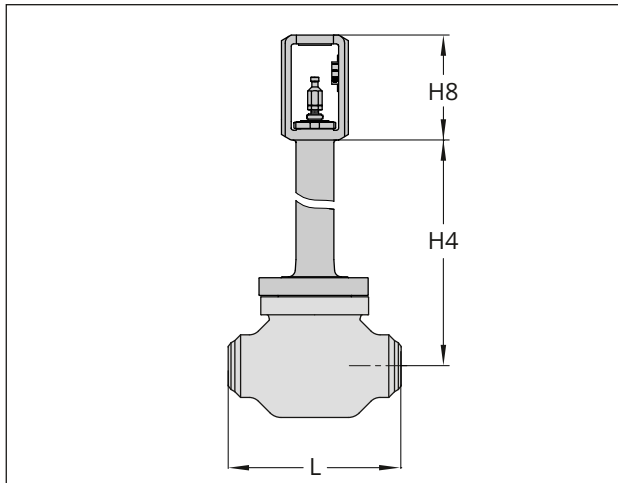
Type 3251/3251-AM with bellows seal or insulating section
